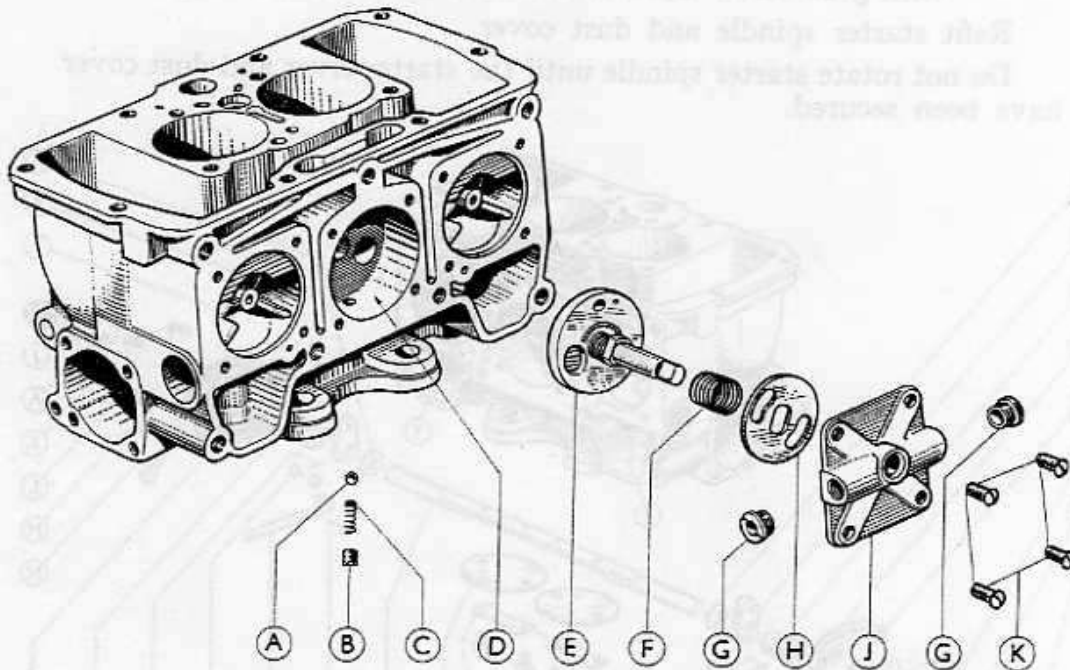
RE-ASSEMBLING AIR VALVES AND STARTER ASSEMBLY.
